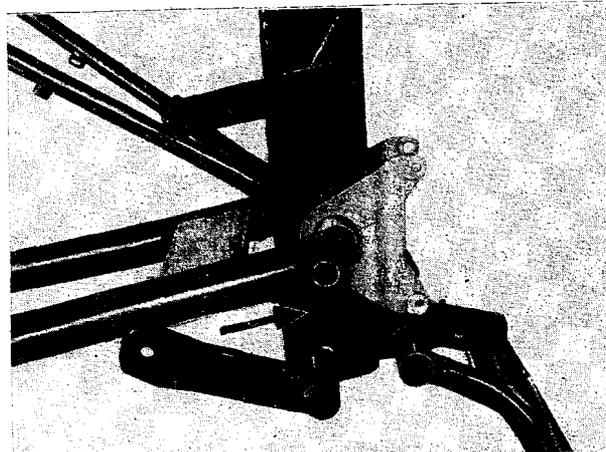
Put on the rear-wheel swing-fork in the direction of the arrow-head; pressure rings already removed
